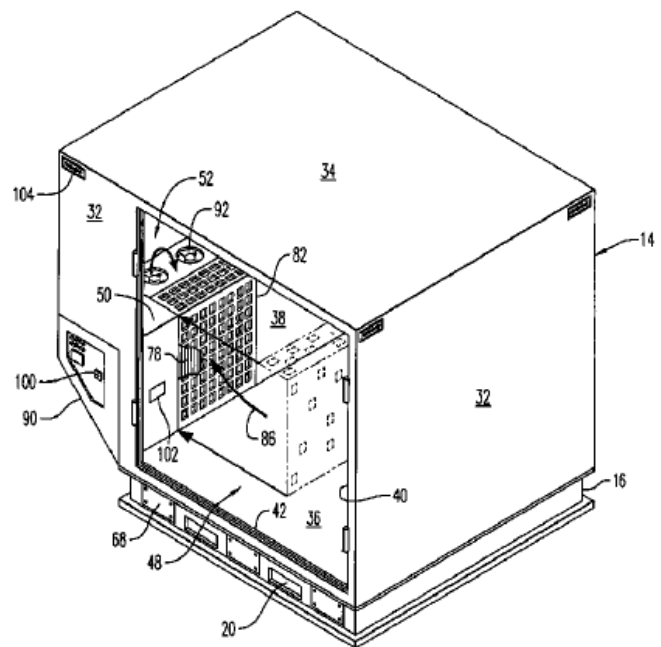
A PALLET SIZED SHIPPING CONTAINER BUILT FOR AIRCRAFTS [9].
